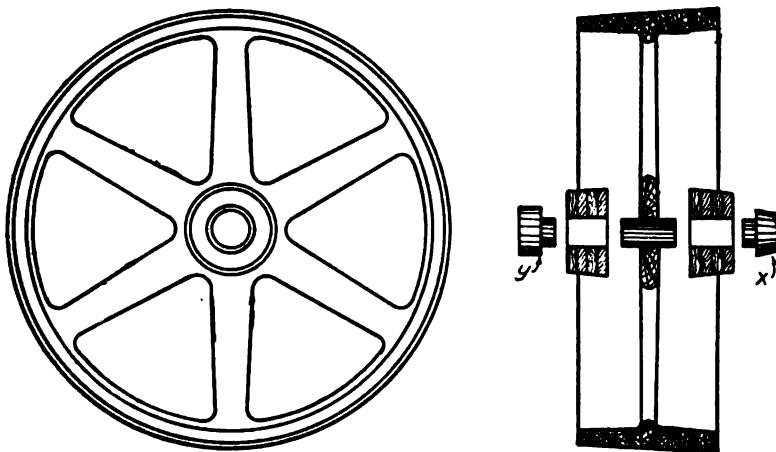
Sectional View of Pattern for 20-Inch Pulley
